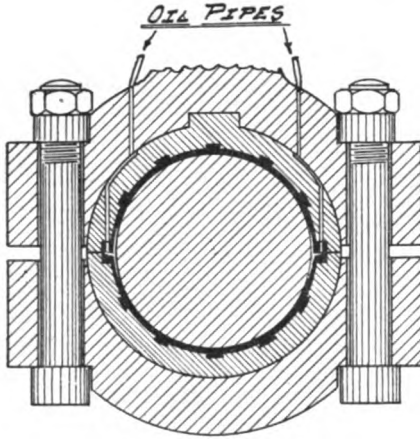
LUBRICATION OF CRANK END OF CONNECTING ROD ON A VERTICAL ENGINE.
